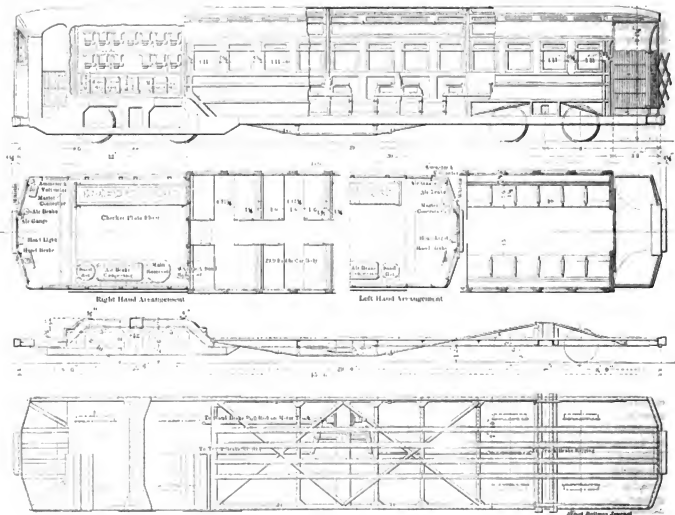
LONGITUDINAL SECTION AND PLAN OF CAR AND OF FLOOR FRAMING
